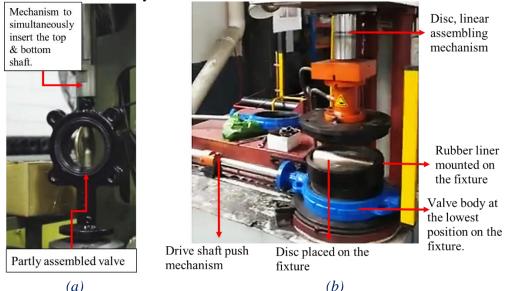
Semi-automated valve assembly mechanism implemented at: (*a*) - *Milwaukee Valves* [2] and (*b*)- Ho-Cun valves [3]
